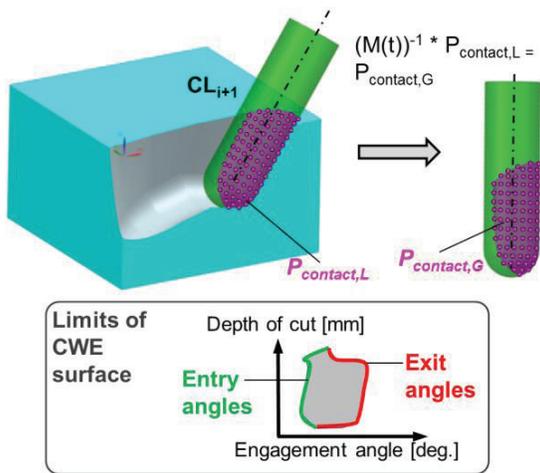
Determination of contact points corresponding to the cutter workpiece engagement surface
